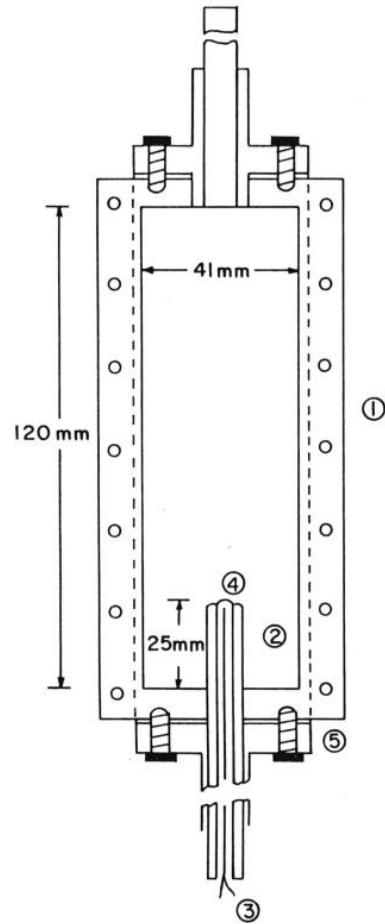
Schematic diagram of the mould used in the mechanical stirring(tumbling) experiments. (1) stainless steel mould (2)cylindrical plunger (3)chromel-alumel thermocouple (4) 4mm glass tube (5) aluminum seal olate [5].
